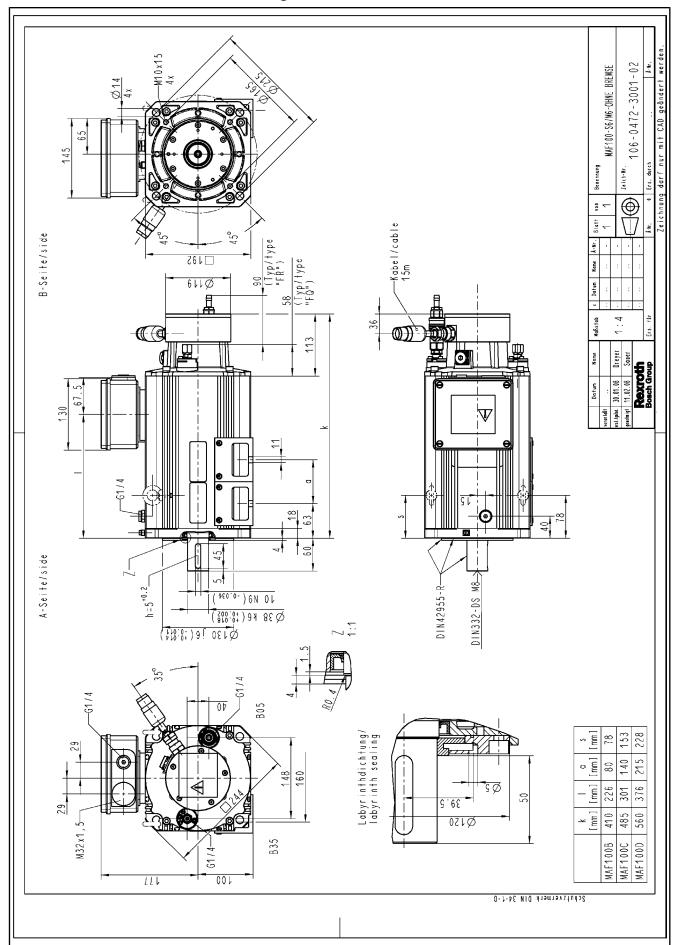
Dimension sheet MAF100 with brake 1 or 5
